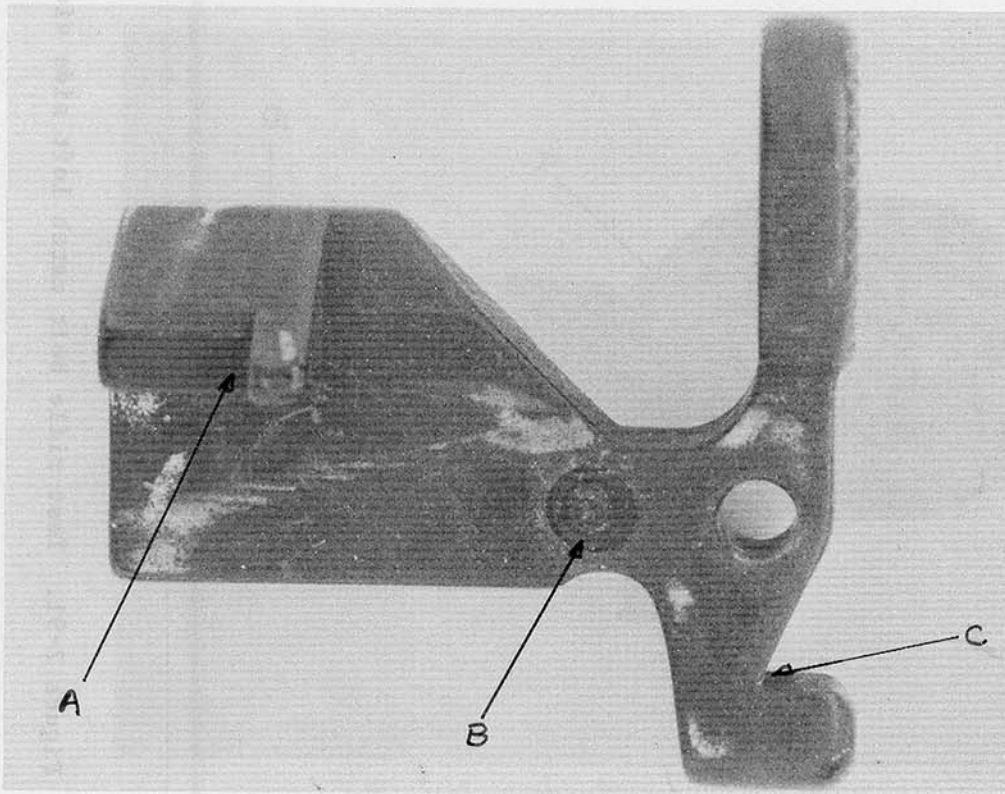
Colt M16A1 rifle SN 6418244 bolt catch front view.
